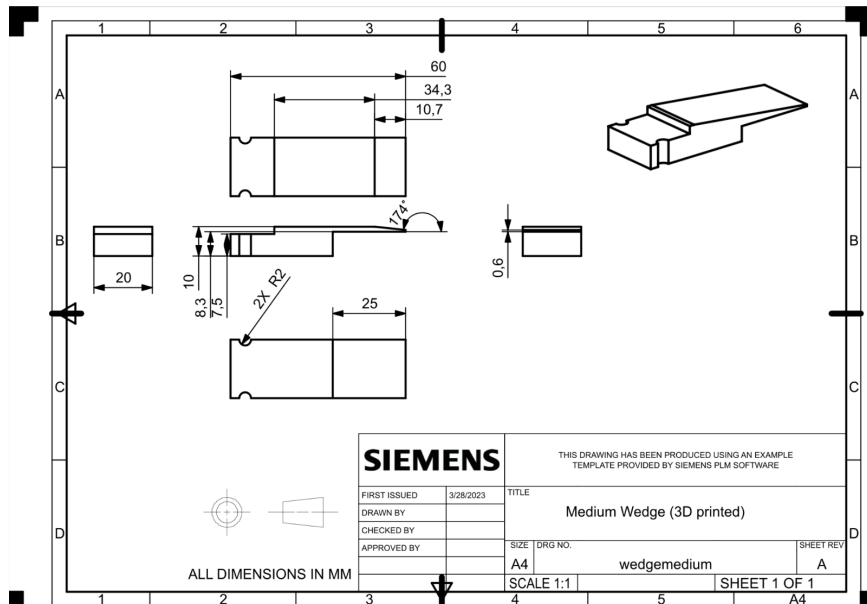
Engineering Drawing of Medium Wedge (3D Printed)
